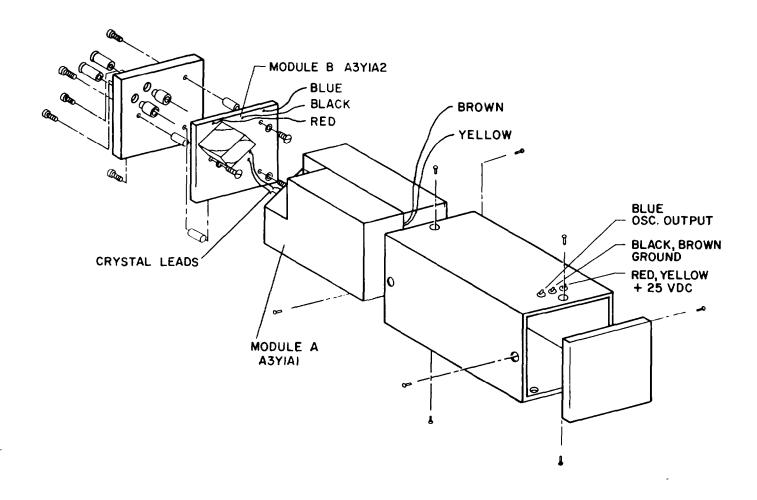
Disassembly of 1-MC Oscillator A3Y1. (ELECTRONIC RESEARCH CO.)
